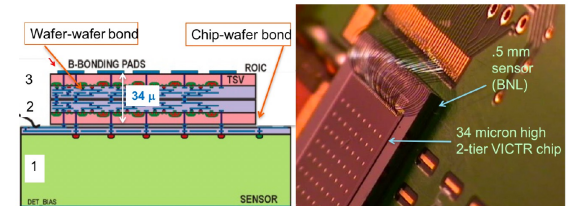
Left - Sketch of the two-tier 3D Stack. Right - Photograph of the VICTR stack mounted on a PC board.
